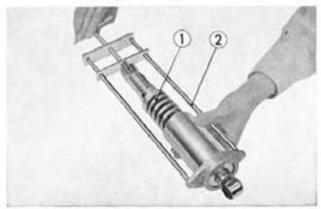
(i) Rear cushion spring (2) Rear cushion disassembling tool
